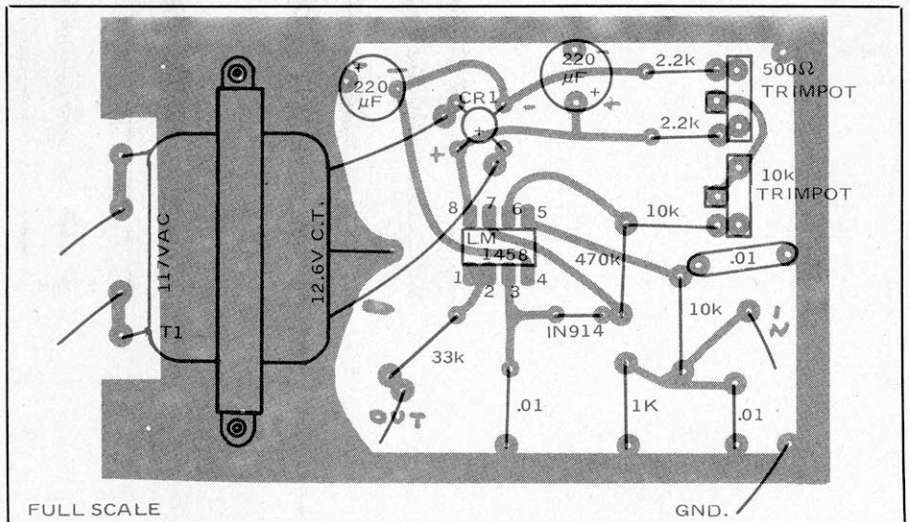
Foil-side, full-scale pattern of the pc board. Circuit board is single-side glass-epoxy material. Grey represents copper.
